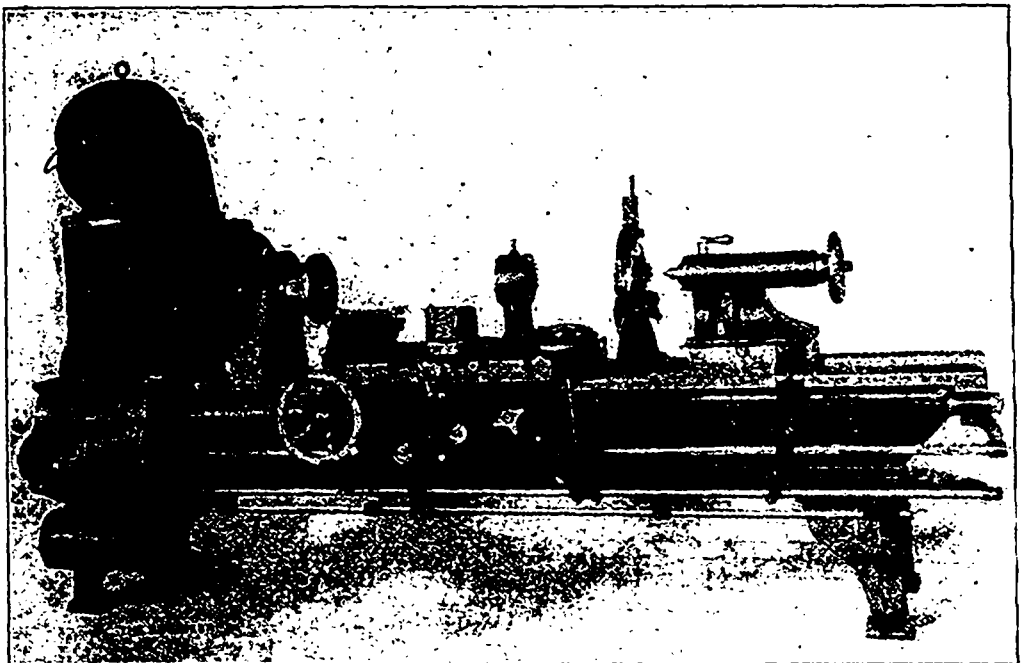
24-inch Screw-cutting Lathe driven by a C-W Form I Motor with MV Control.
